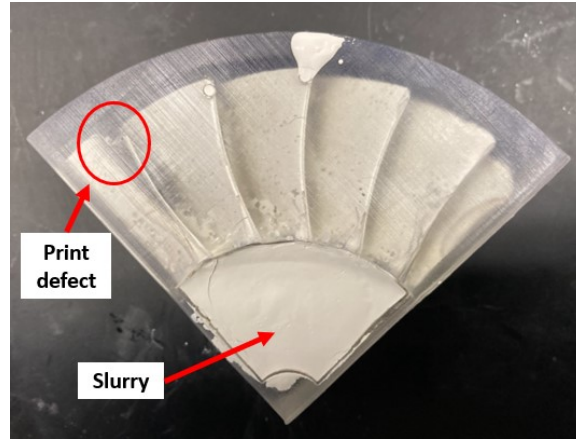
Quarter turbine mold printed in the Formlabs printer.
